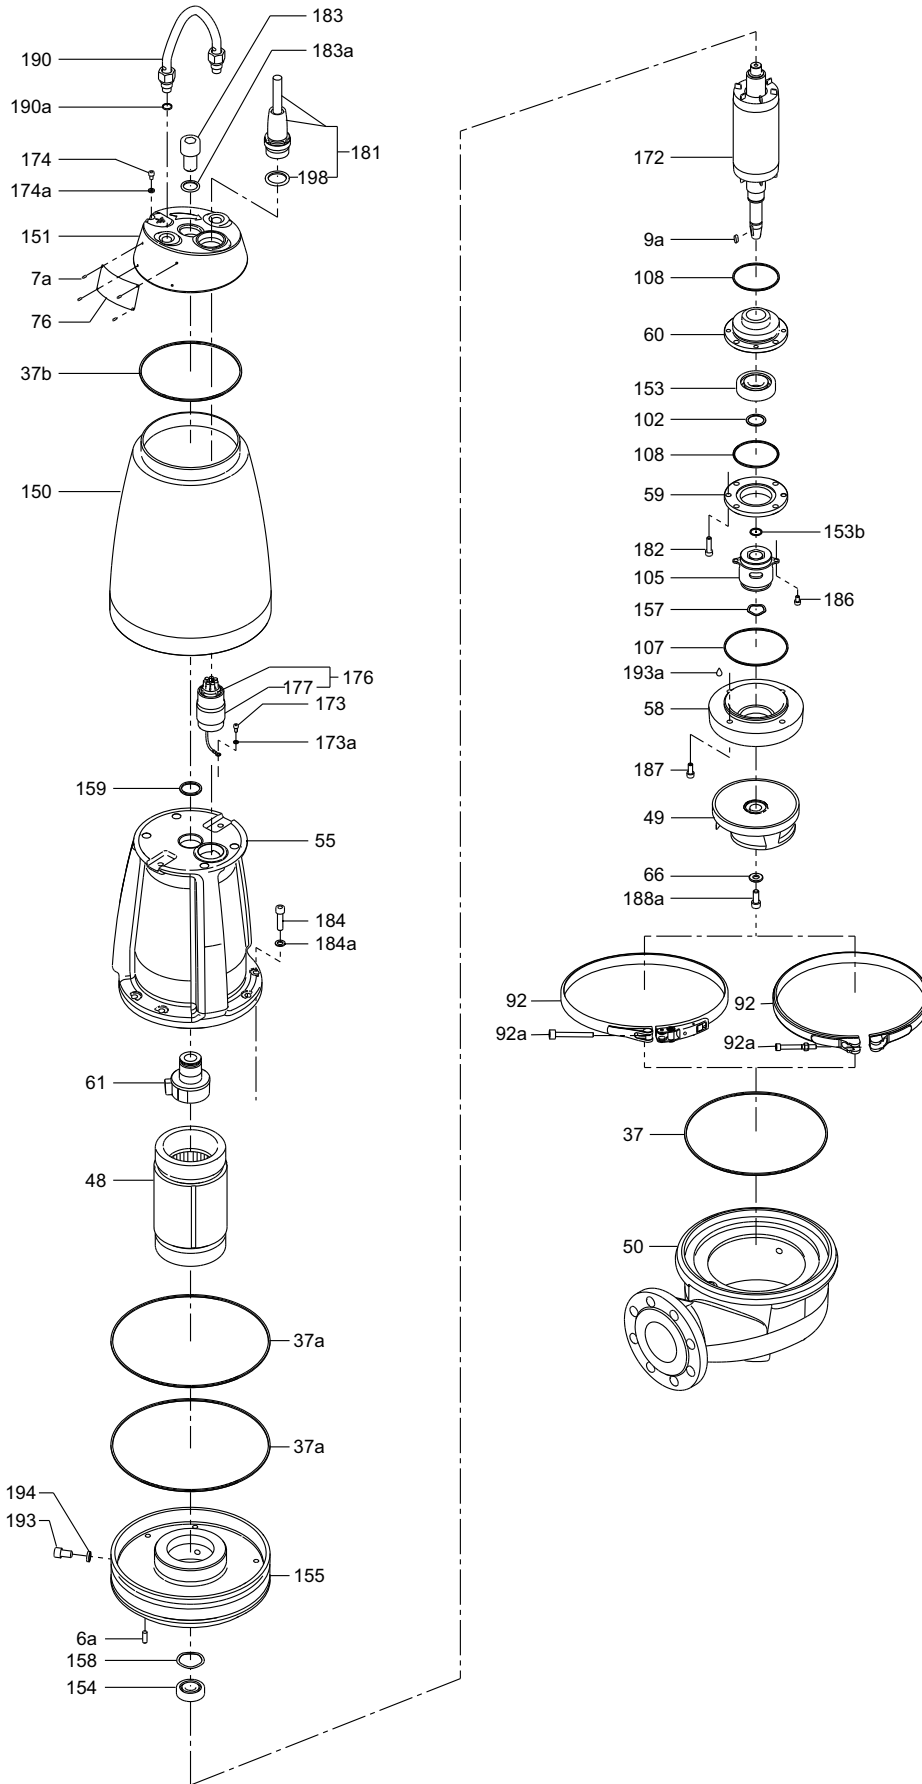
Exploded view, SEV pump with SuperVortex impeller
